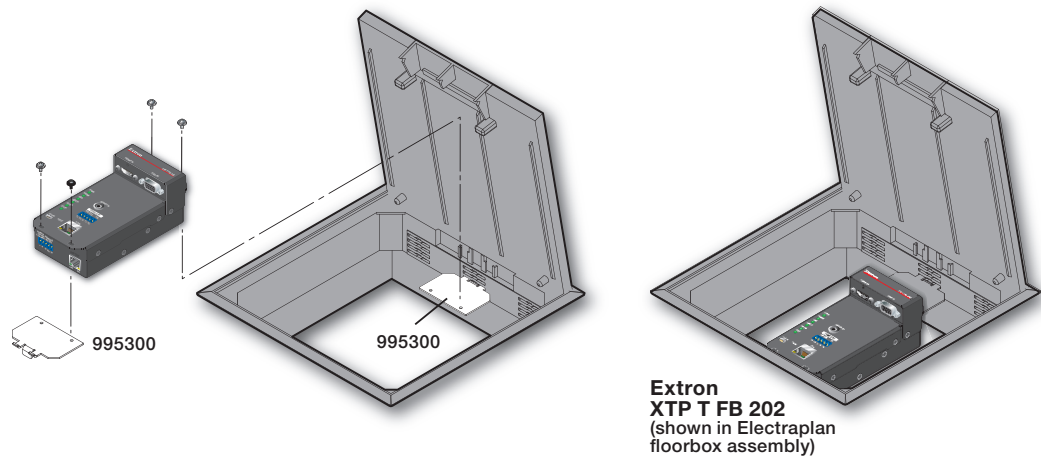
Mounting the XTP T FB 202 into an Electraplan or PUK Floor Box
